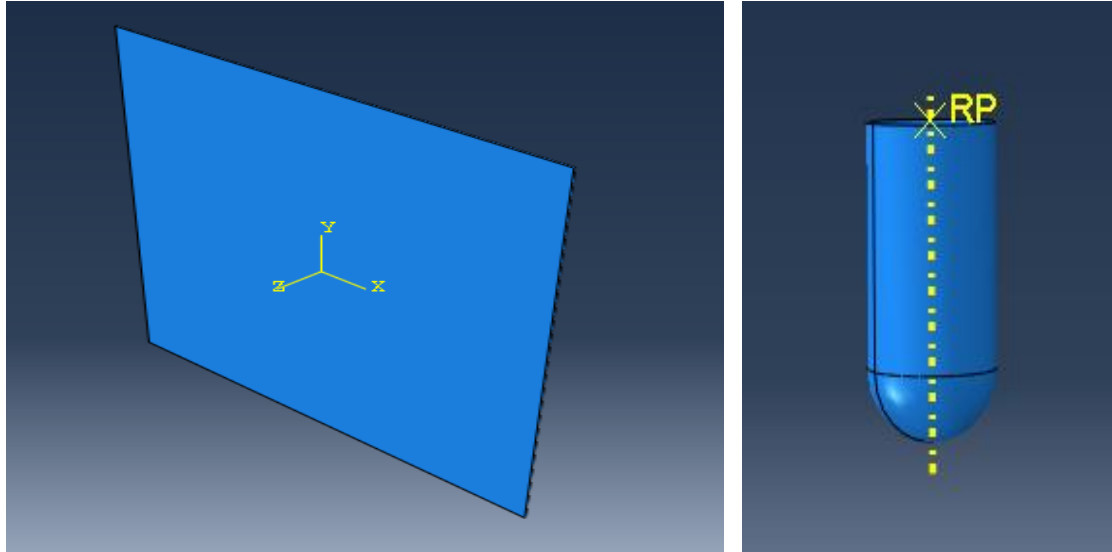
2 shows sheet blank made by ABAQUS (a) and shows punching tool (b)
